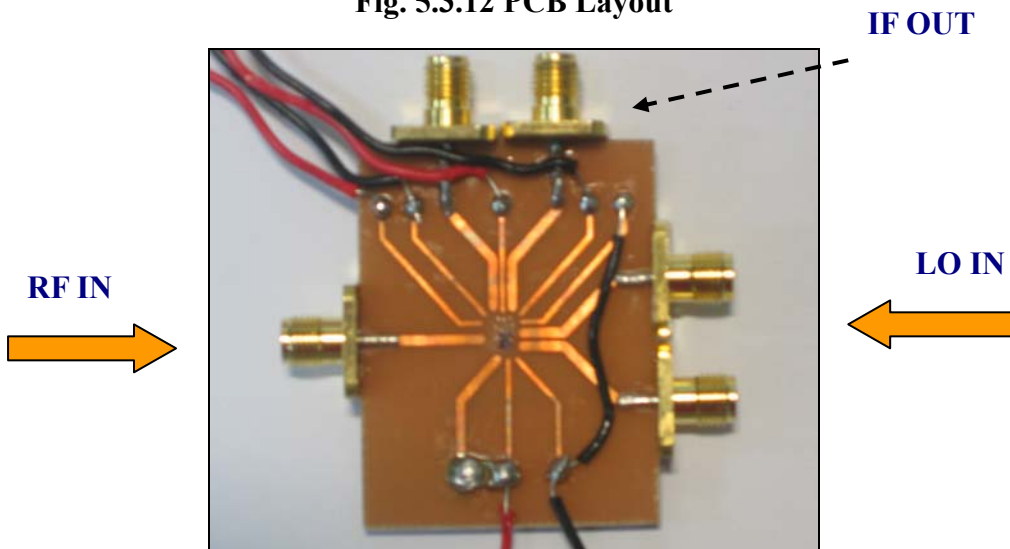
Photograph of Practical FR4 PCB circuit
